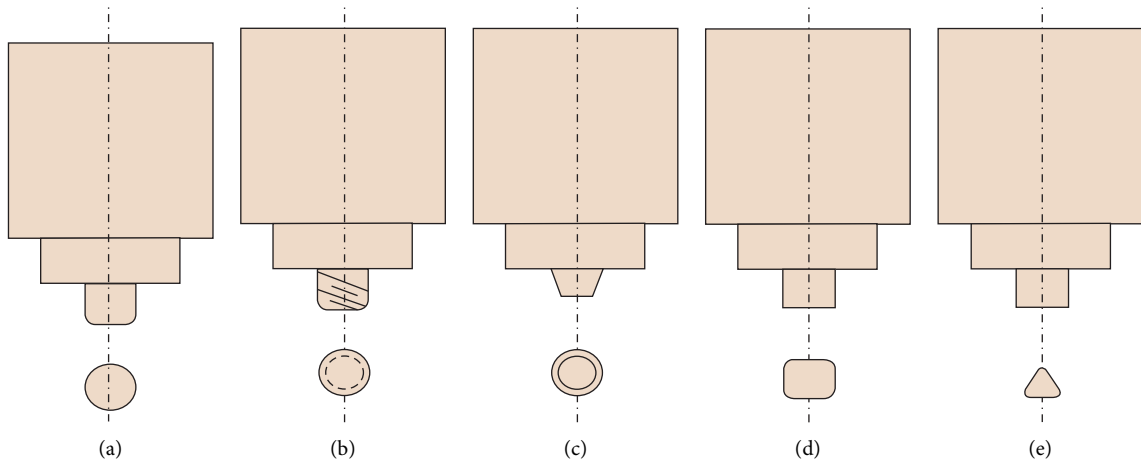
Different tool profiles: (a) straight cylindrical, (b) threaded cylindrical, (c) tapered cylindrical, (d) square, and (e) triangle.
